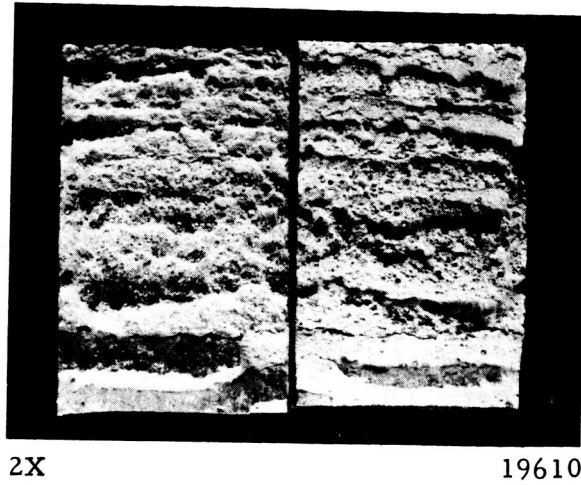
shows the fracture surface of the tensile specimens taken from Plate V-20. Specimens B-1 and B-2 taken near one surface and near the center of the plate, respectively, each exhibit lack-of-fusion defects. Specimen B-1 also contained considerable porosity. Specimens B-1 and B-2 failed at 38.3 and 38.9 ksi, respectively. Specimen B-3, taken near the opposite surface of the plate, had very few visible defects in the tensile fracture surface and failed at 41.9 ksi.
